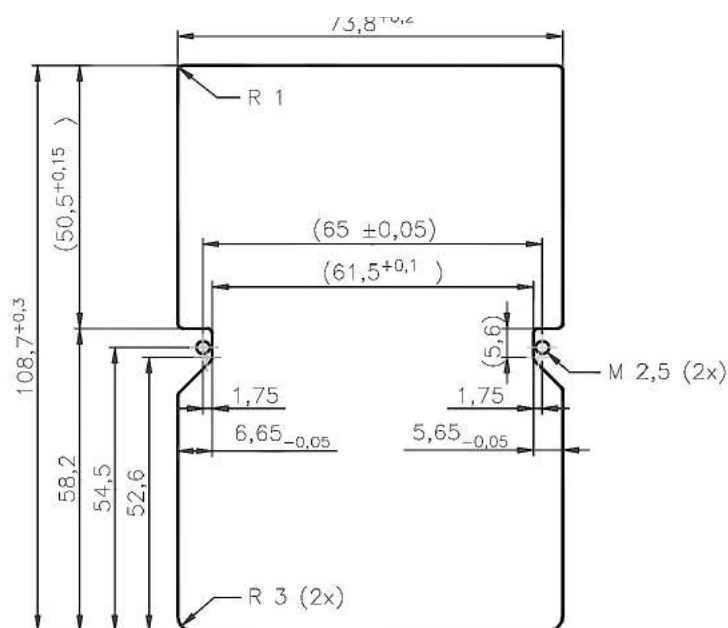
Dimensions front panel installation of GPT-4352-60 in mm
